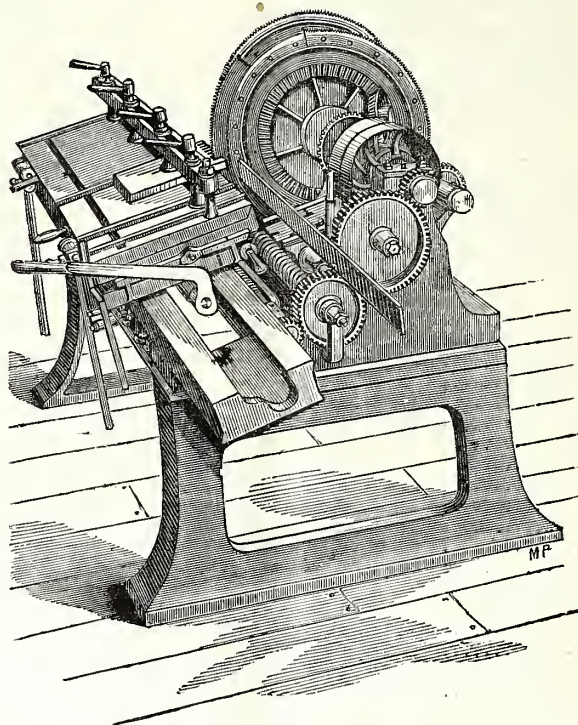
ROBINSON'S PATENT DOVETAILED MACHINE.
